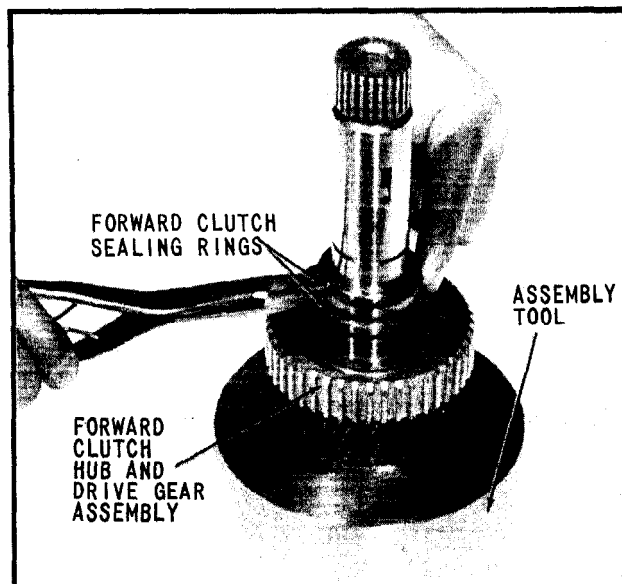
Installing Forward Clutch Sealing Rings on Drive Gear
